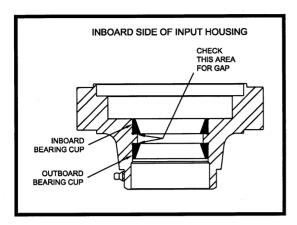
Installation of Bearing Cups in Input Housing
